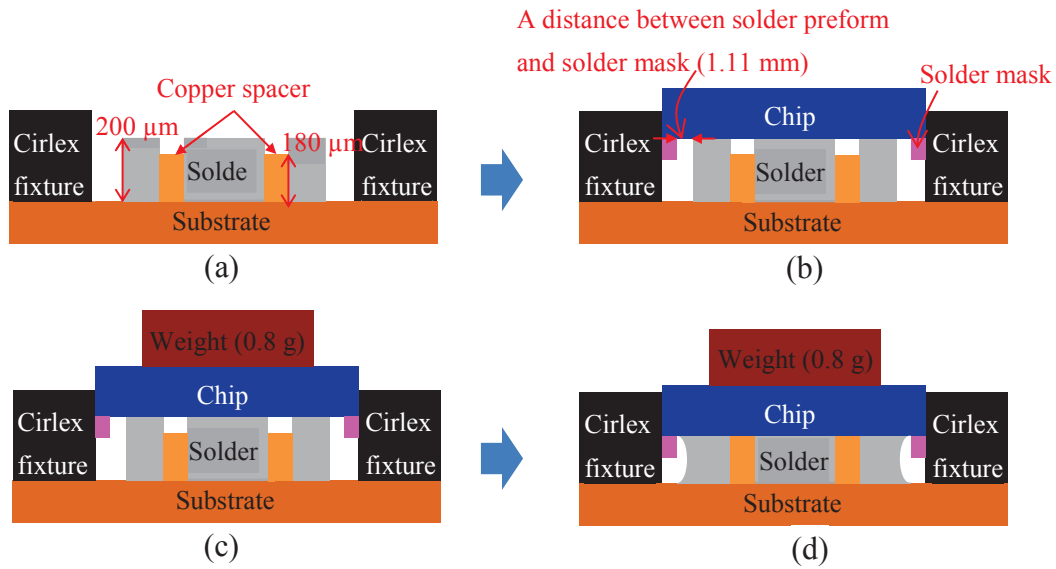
Developed packaging process for hourglass joint in Figure 3-2 (not to scale). Place solder preform, spacers, and Cirlex fixtures on the substrate (a); place chip with solder mask with the dimension in (9)(b); apply 0.8-g weight on the chip (c); and reflow using a vacuum chamber in Figure B-8 (d).
